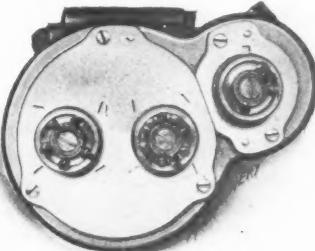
End View of Drill Head showing Arrangement of Spindles
